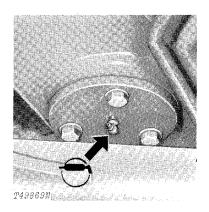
Lower Cluster Gear Shaft Bearing (1 Point)
